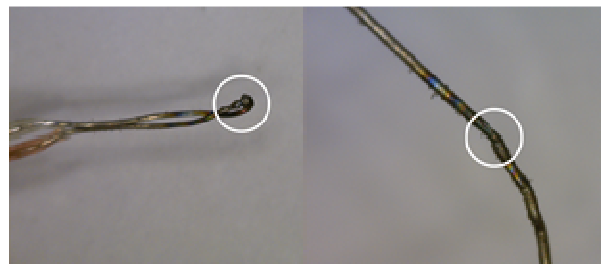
The contact point of the ordinary TC(left) and of the butt-welded TC(right)
